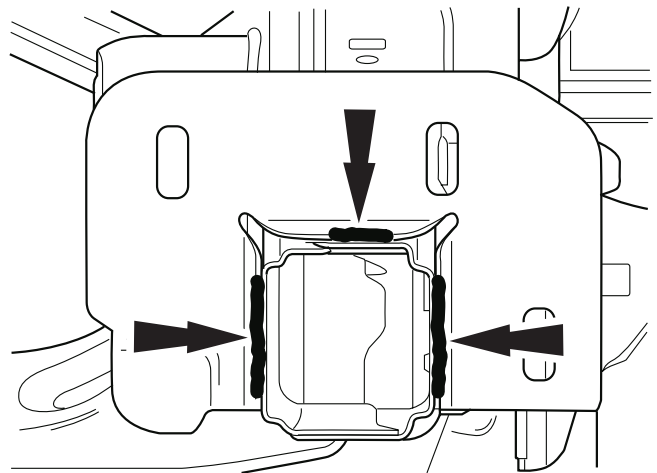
FRONT BUMPER BRACKET SHOWING FINAL WELD PATTERN, RH SHOWN, LH SYMMETRICALLY OPPOSITE
